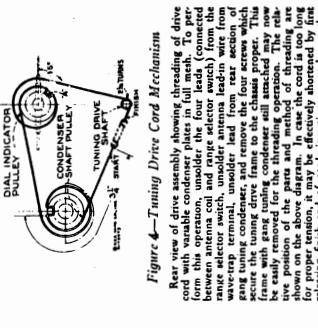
Tuning Drive Cord Mechanism: Rear view of drive assembly showing threading to drive cord with variable condenser plates in full mesh. The drive cord is connected to the tuning drive frame, which is secured to the chassis by a screw through the tuning drive frame to the chassis proper.
